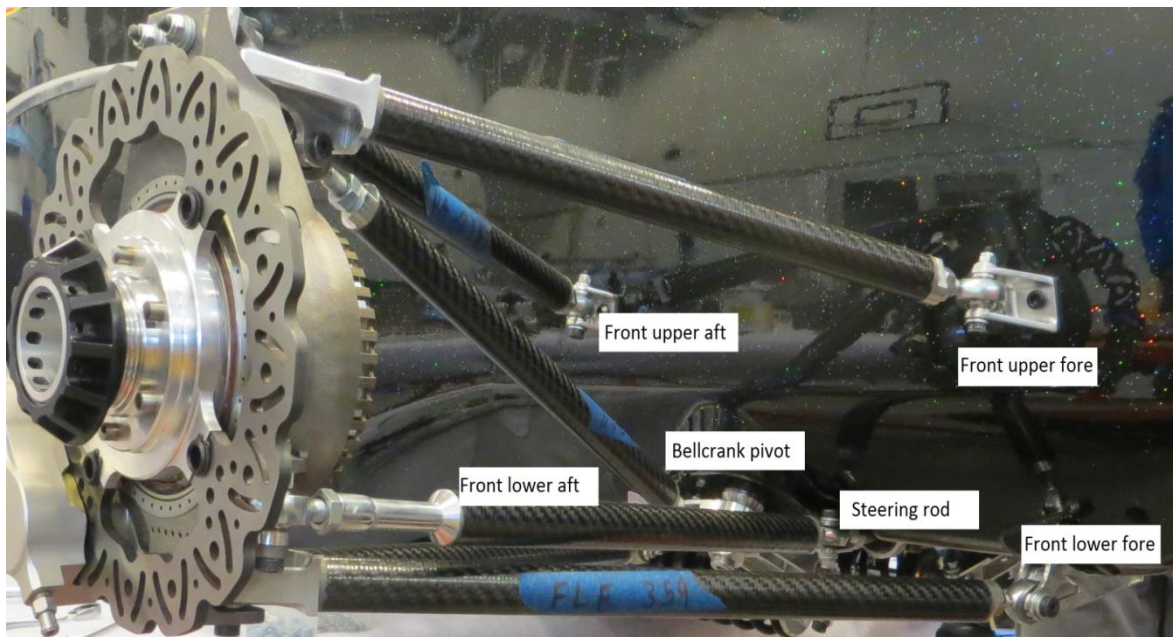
Illustration the chassis attachment points for the front suspension. (Damper attachment not visible)
